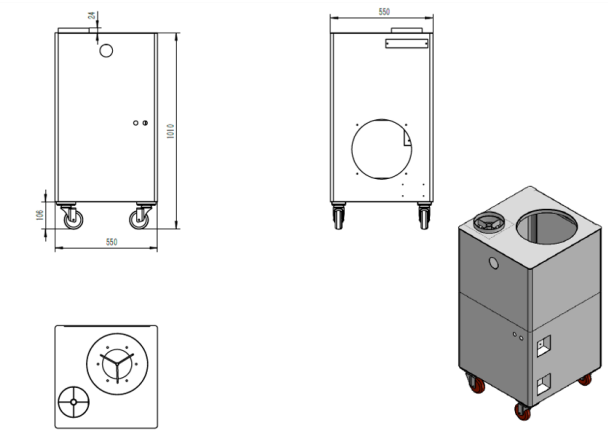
The dimensions and 3D render of the 05814 SIP FX300 PROFESSIONAL WELDING FUME EXTRACTOR.
